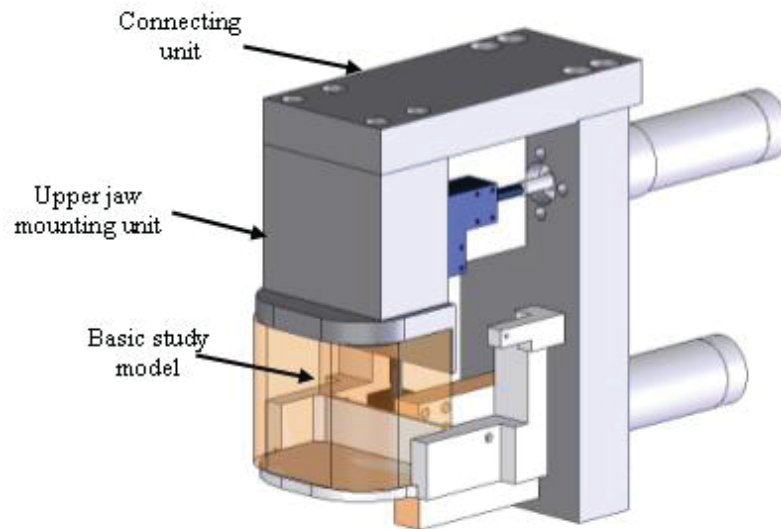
Upper jaw, mounting and connecting units (Pap 2005)
